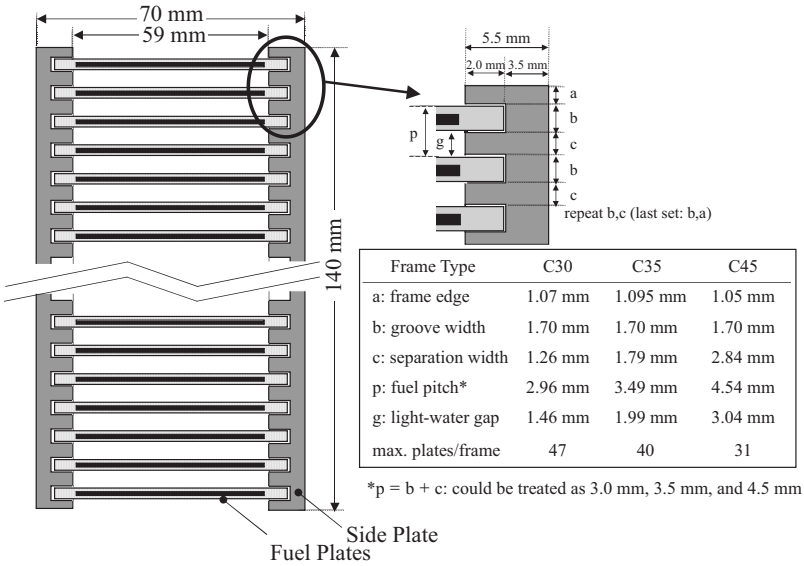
Horizontal cross section of fuel frame and detailed dimensions
